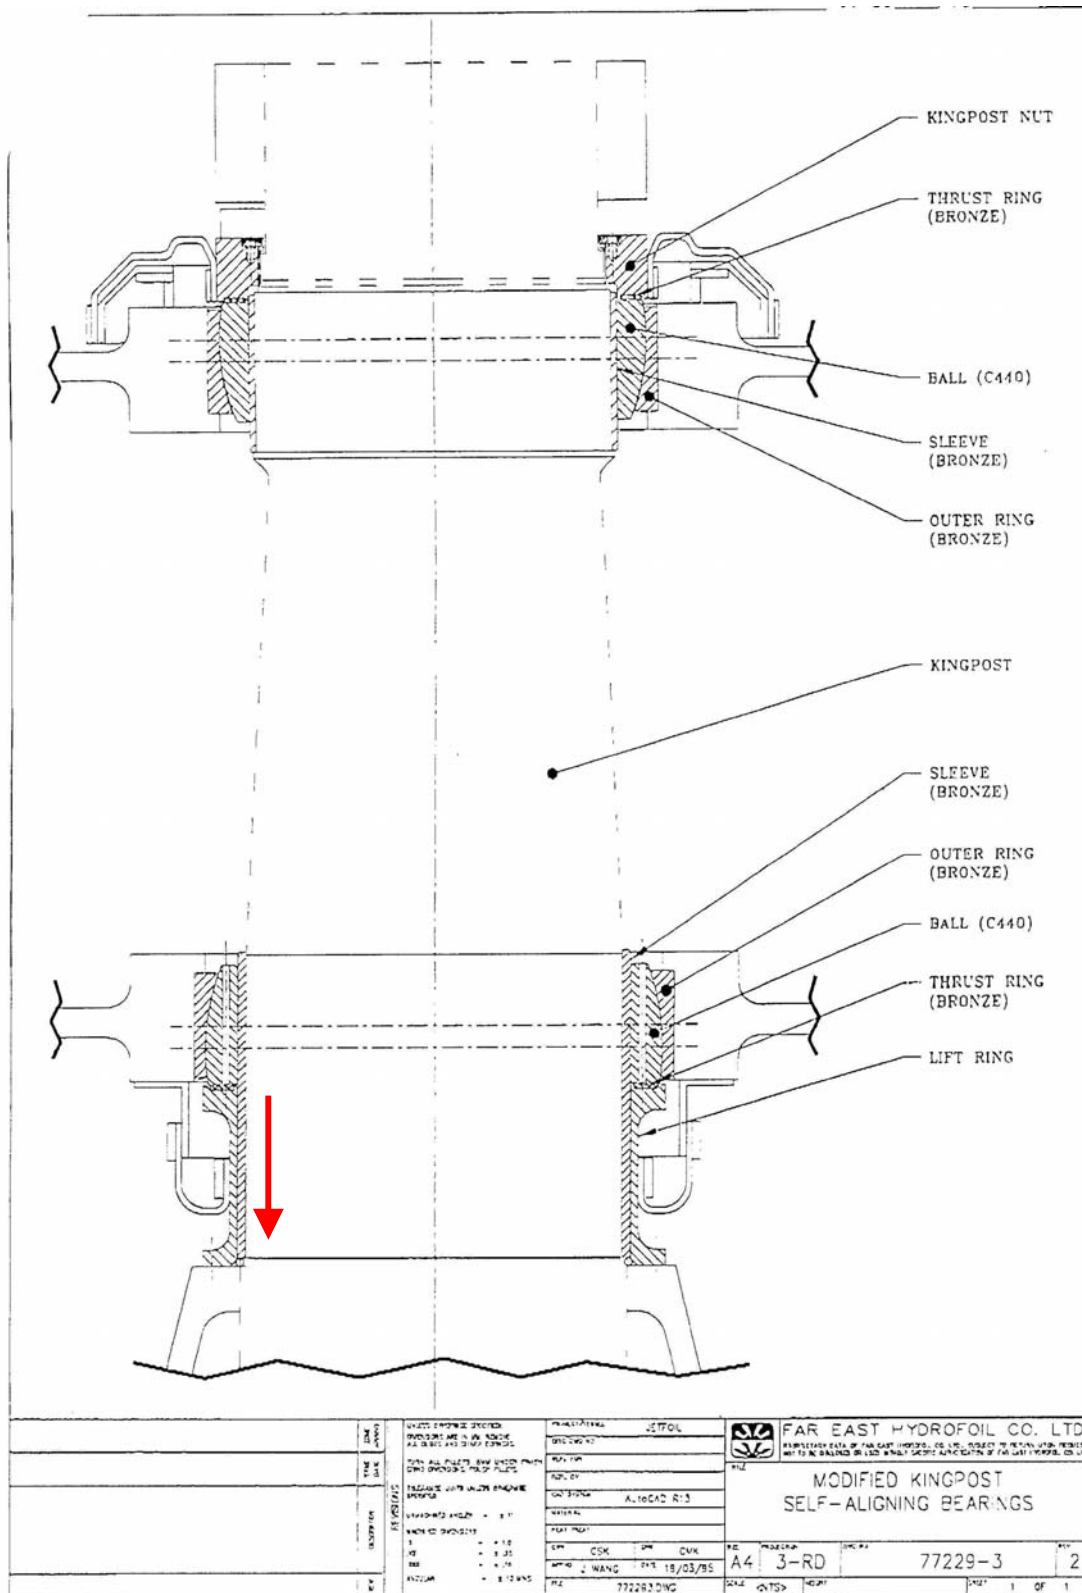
Stepped section near the lower bearing surface of king post (Block-I jetfoils)
